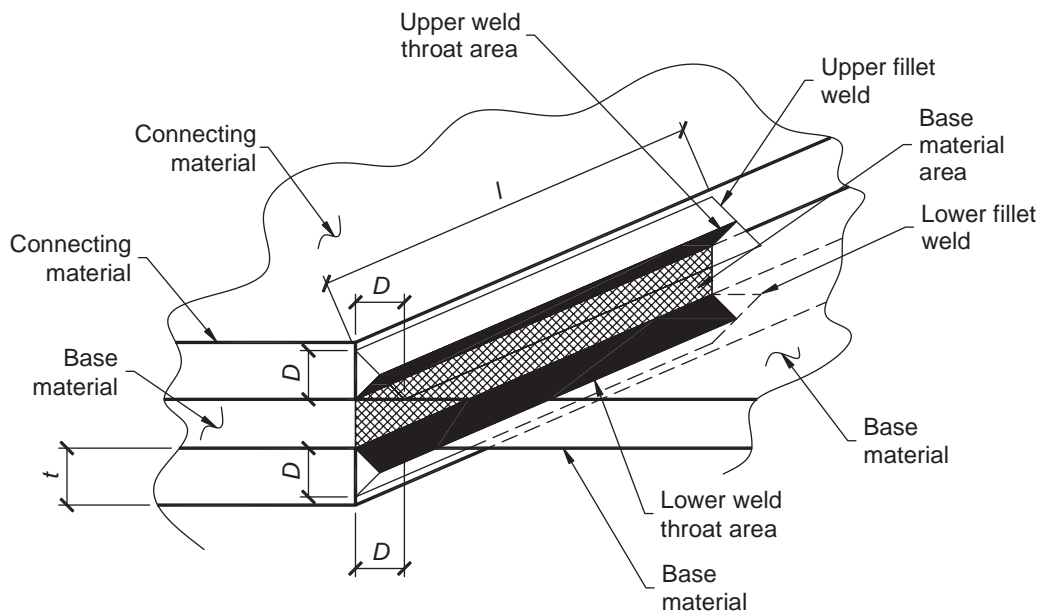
Weld and base material rupture area in a two-sided weld condition.
